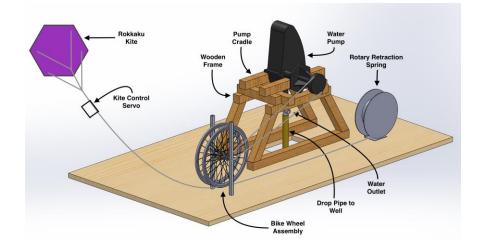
Complete CAD assembly of kite power system (excluding chain tensioner and kite wheel supports)
